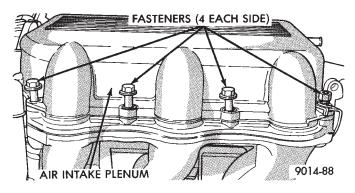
Air Intake Plenum to Intake Manifold Attaching Fasteners
